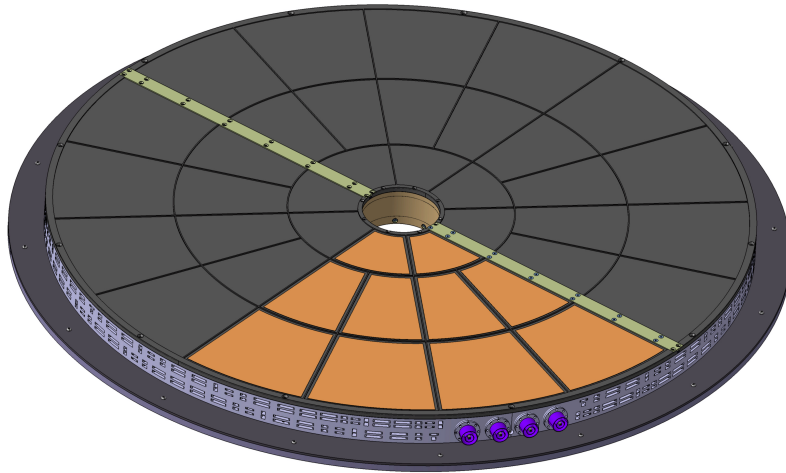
General view of the closed hermetic vessel. The front cover (Kapton heaters partially shown) is made of two parts which are bolted together with composite bracket and tight gasket. The outer ring is holding all electric connectors and coaxial cooling flanges.
